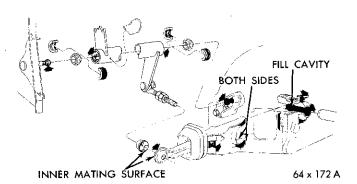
Clutch Torque Shaft and Linkage— Lubrication Points
